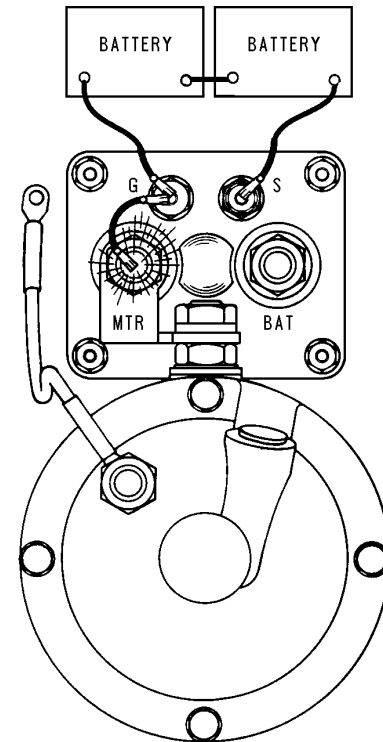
PINION CLEARANCE CHECK CIRCUIT
